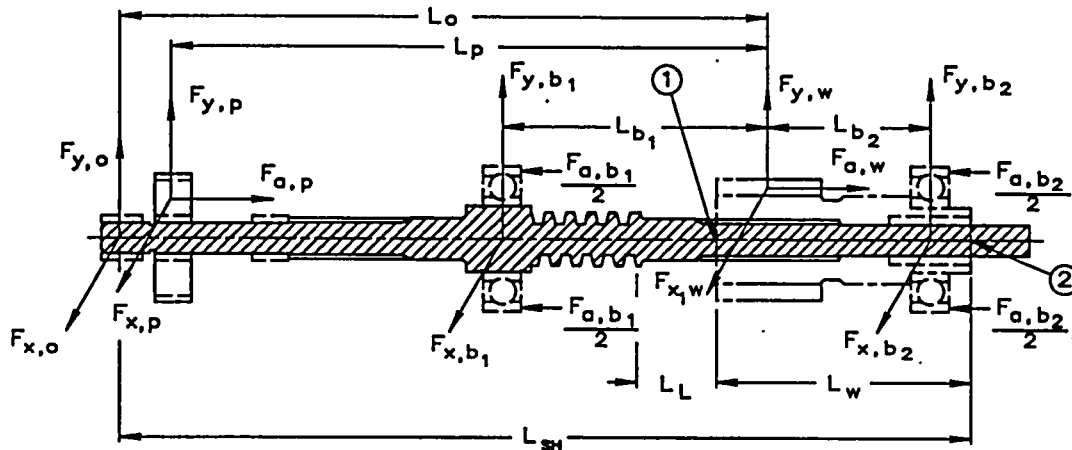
Mechanical Model and Load Diagram for the Worm/Shaft Assembly
